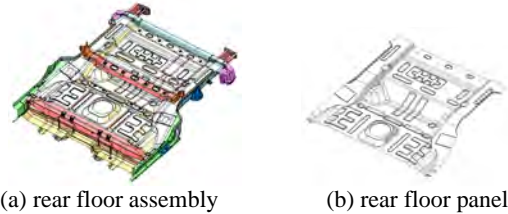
Shape of the rear floor assembly and panel considered in the stamping process.
